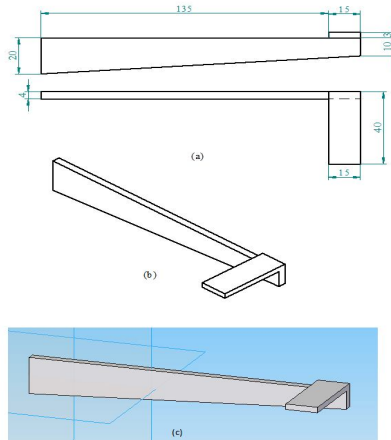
(a) 2D brake pedal, (b) and (c) 3D brake pedal CAD model
